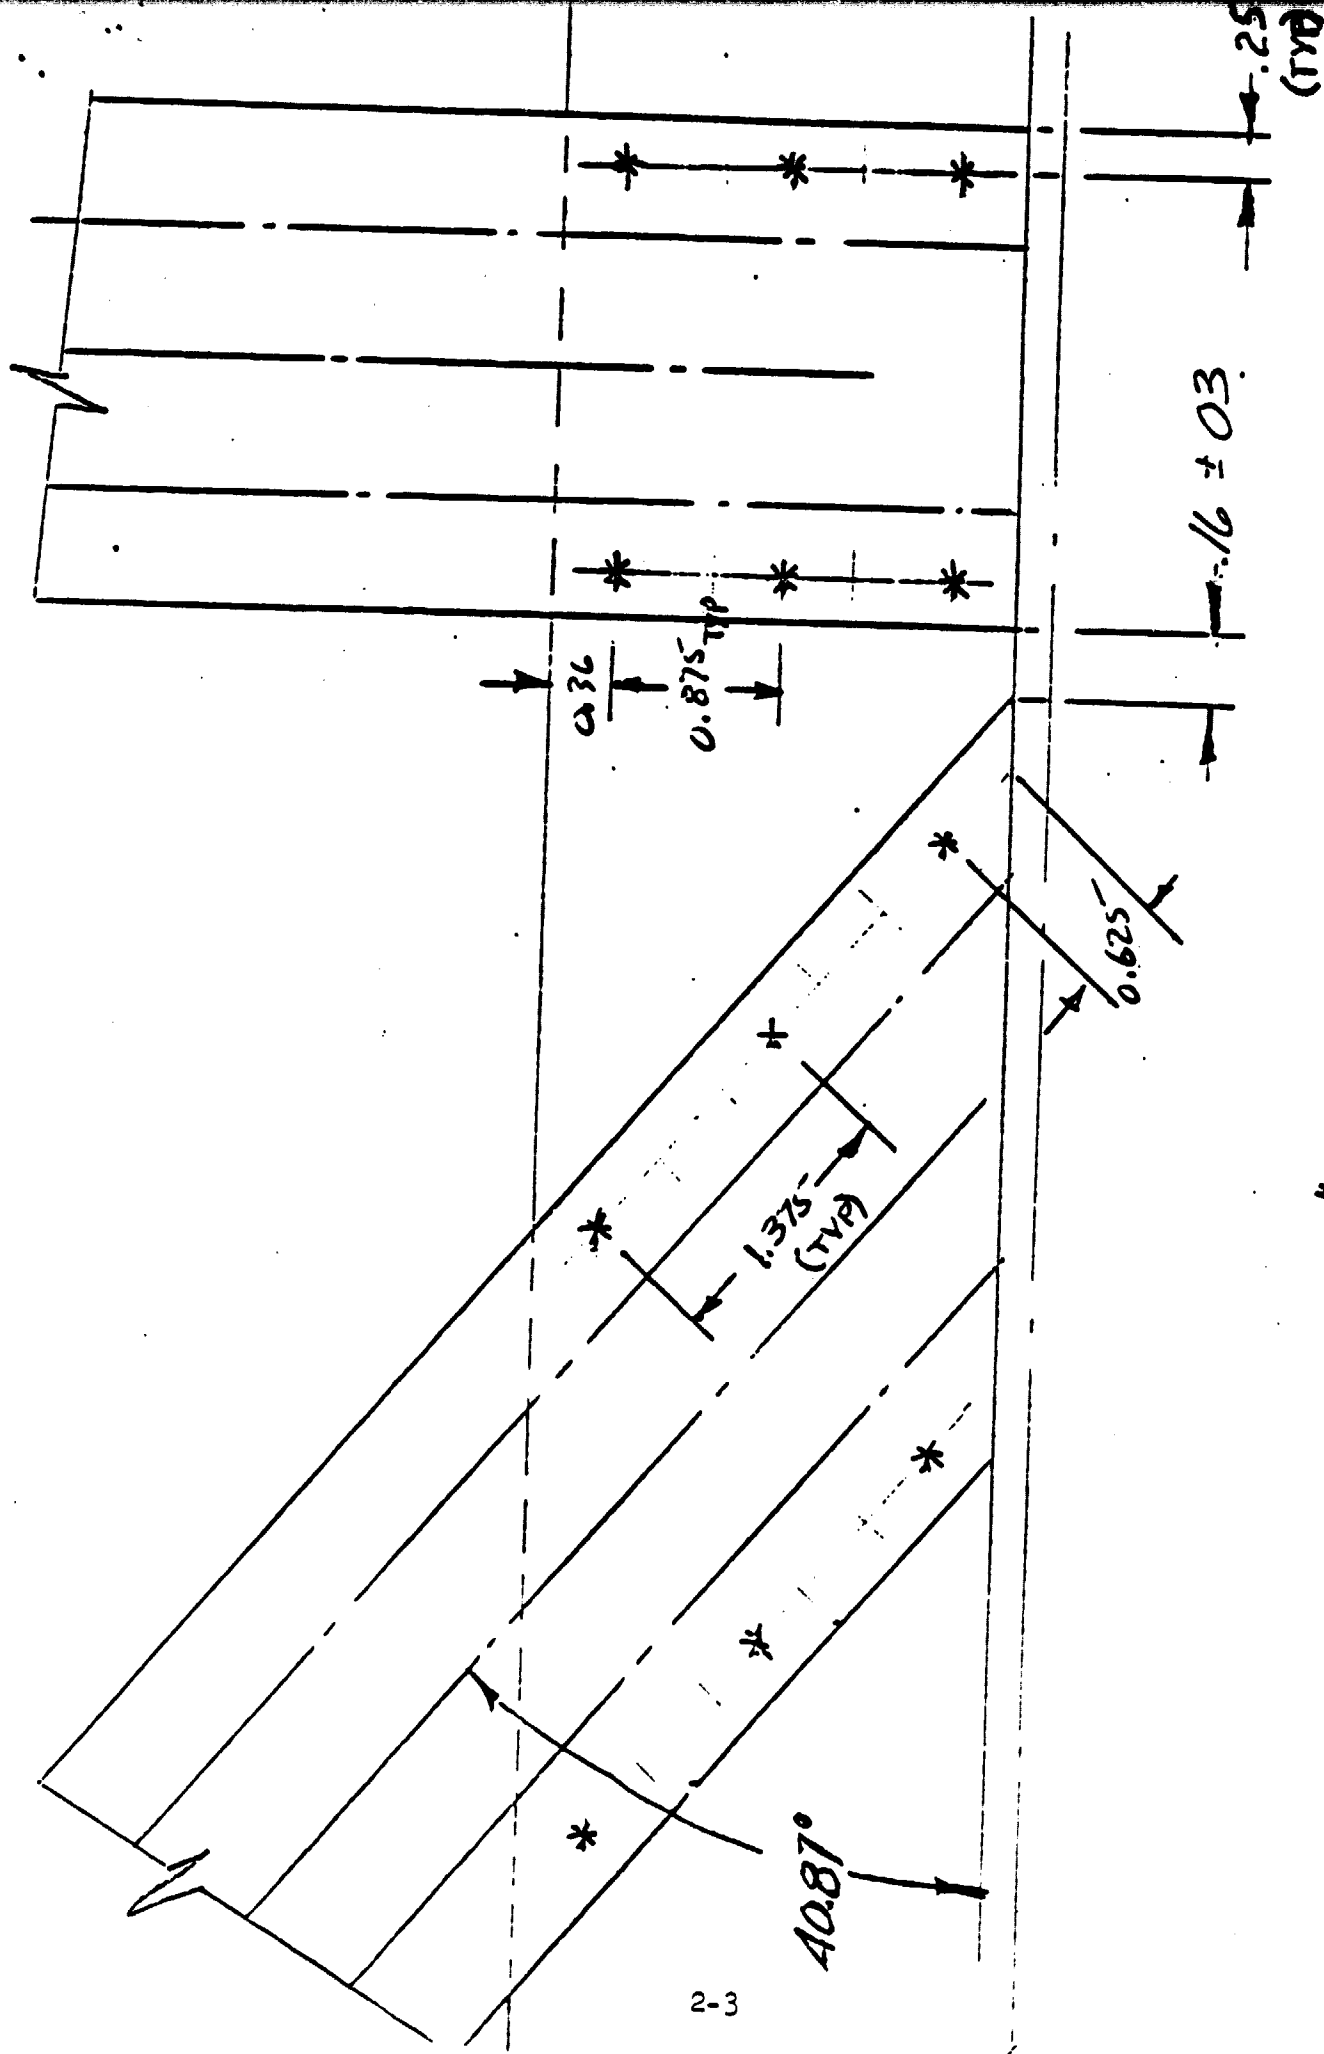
SPOT WELD CONFIG. 1 & WELD/JUNCT
